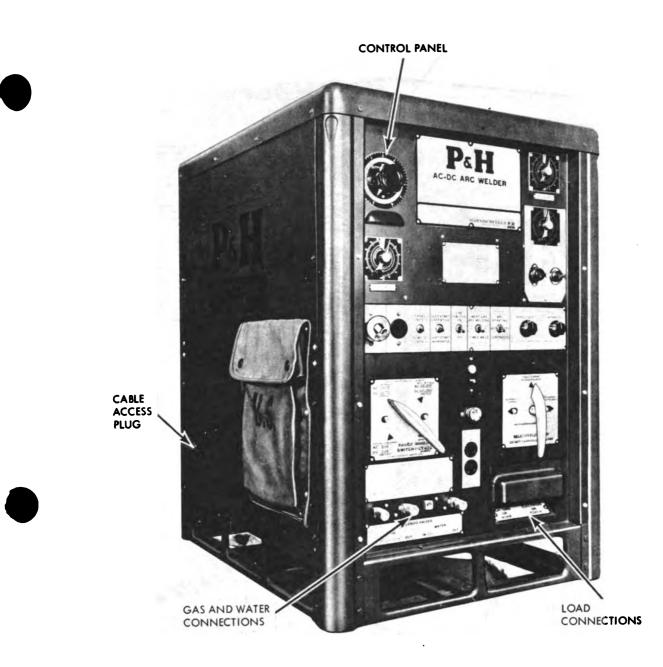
Arc welding machine right-front, three-quarter view with shipping dimensions, Model DAR-\$00HFSG.
